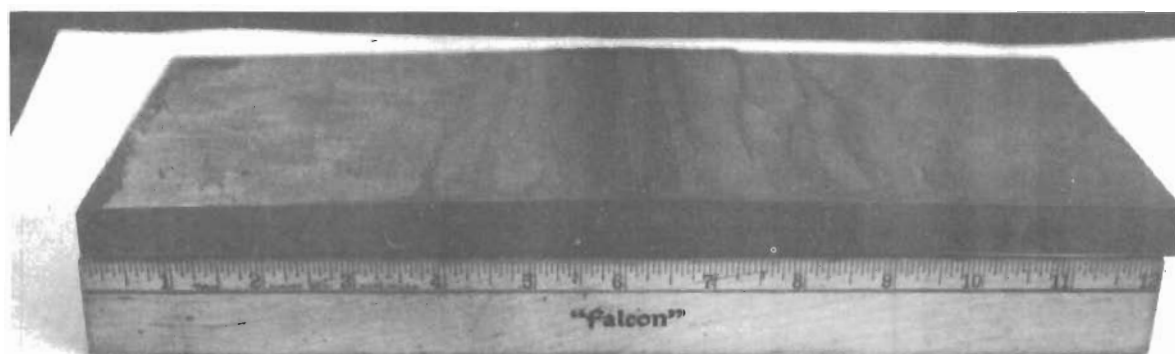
Photograph of MITRON Flux Adhering to Back Side of Welded Plates Forming a "Cocoon"
